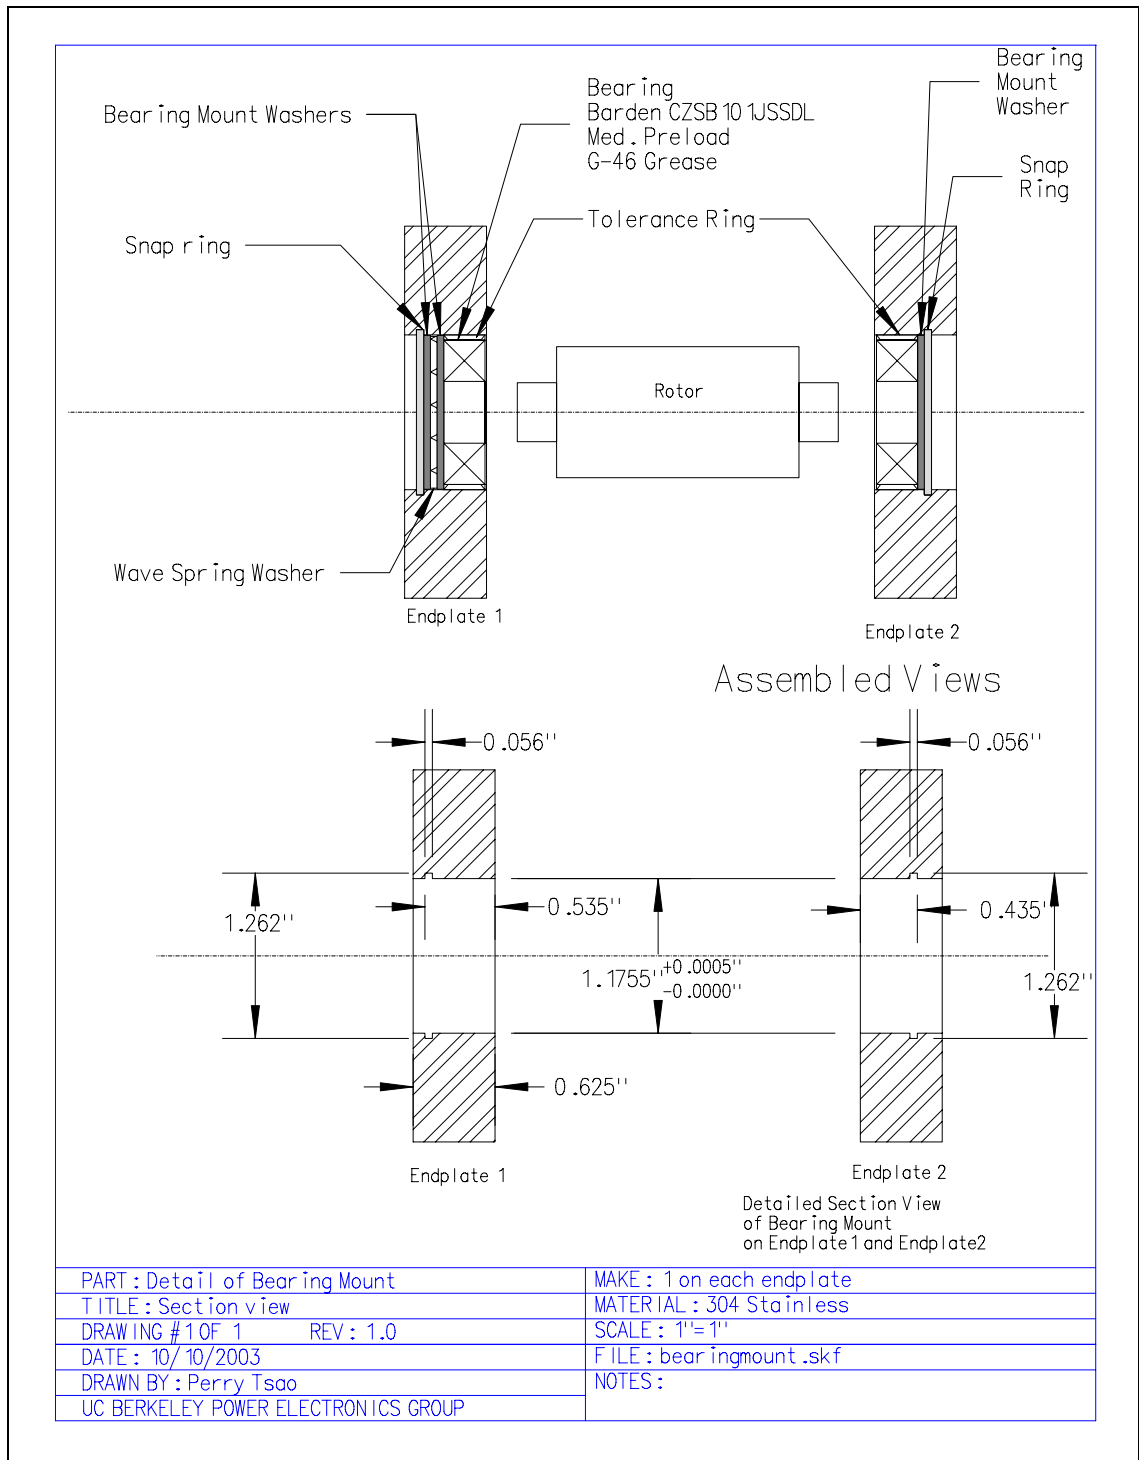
Detail of bearing mount system. The tolerance ring retainer was added later and is not shown.
